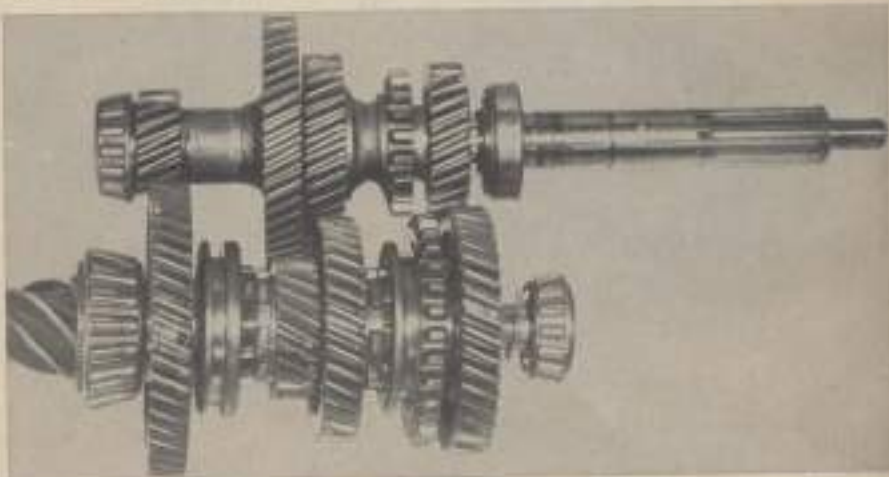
View of removed D-14 and D-15 pinion shaft, main shaft and respective gears.
